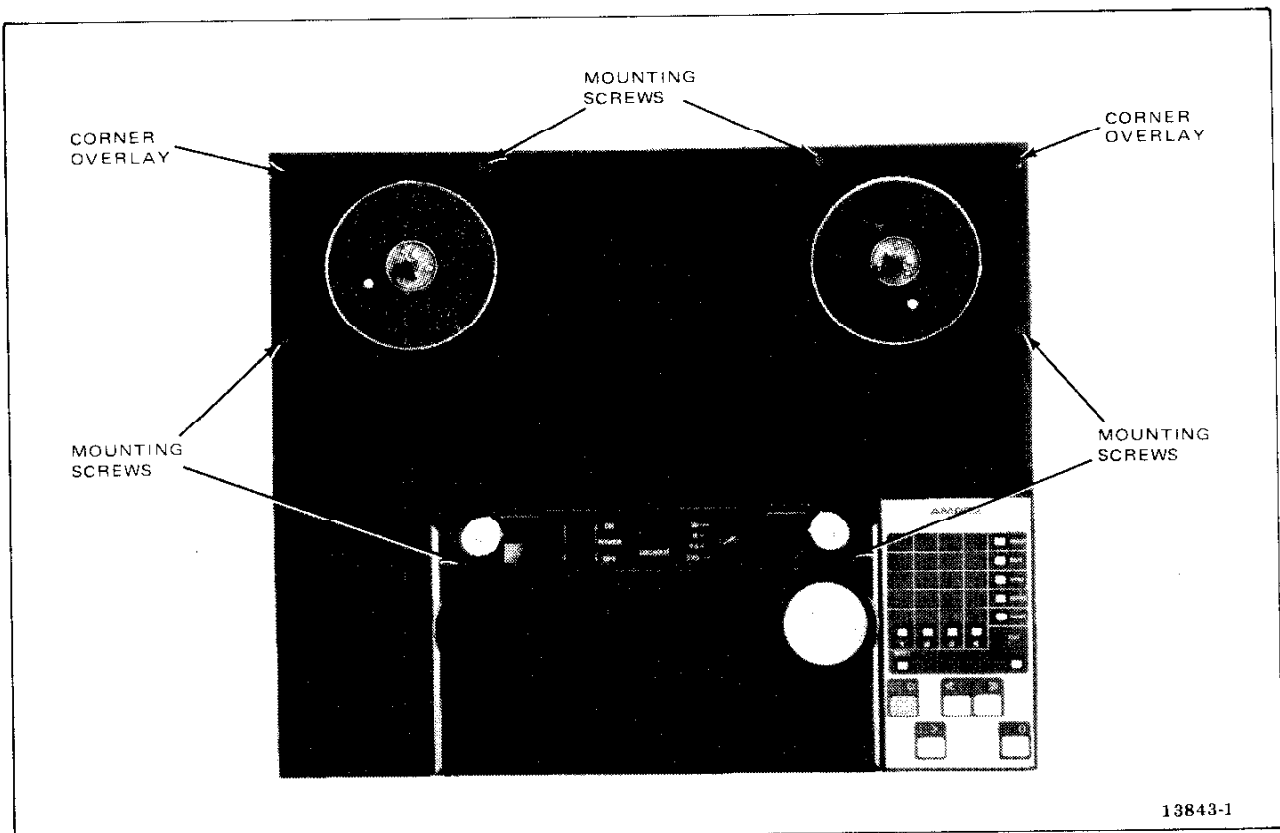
Rear Overlay Panel, Six Mounting Screws
